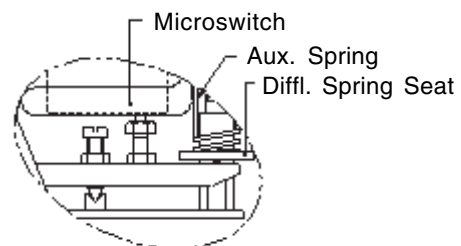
Switch at 'ON' Position - Aux Spring load acting
